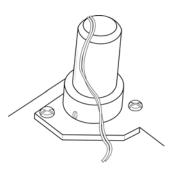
Inspiratory Hold Solenoid P/N 10346
